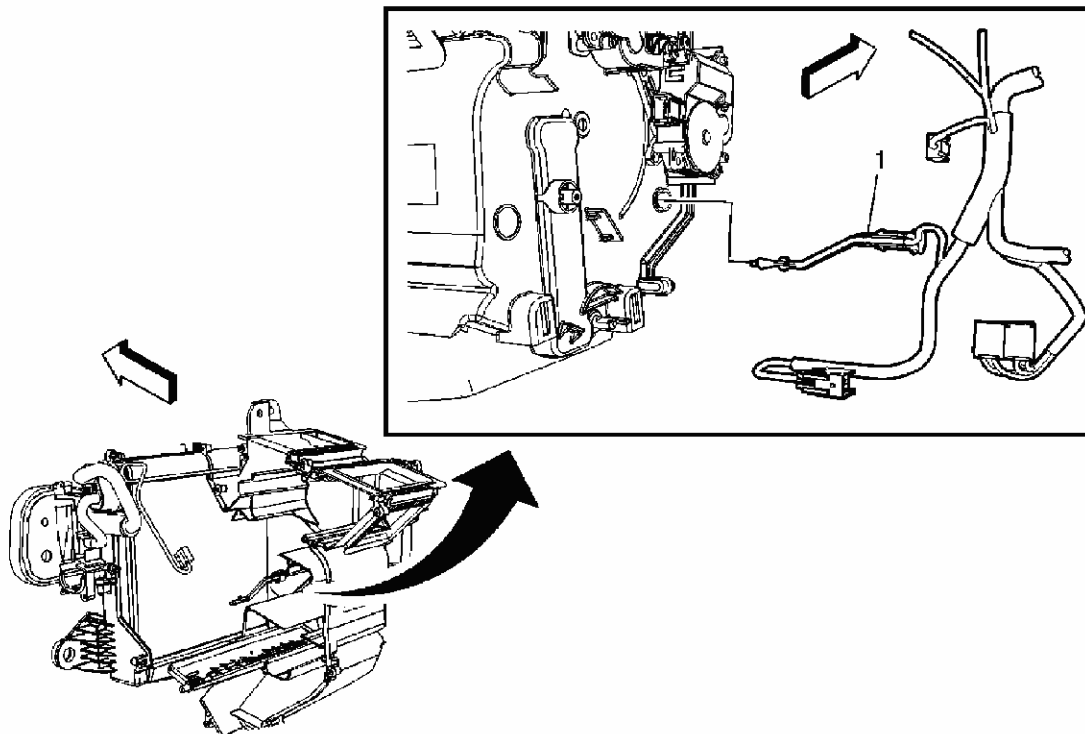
Identifying Heater and Air Conditioning Control Wiring Harness Replacement (w/Evaporator Temperature Sensor)
